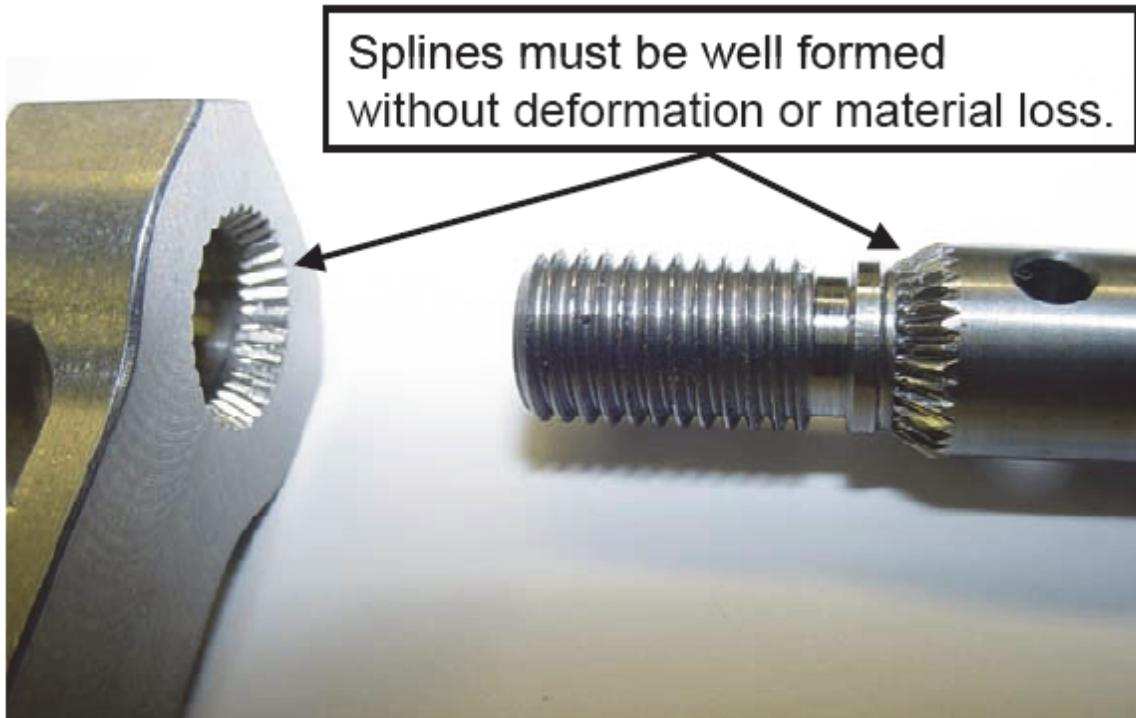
Serviceable Throttle/Mixture Control Lever & Shaft Splines
